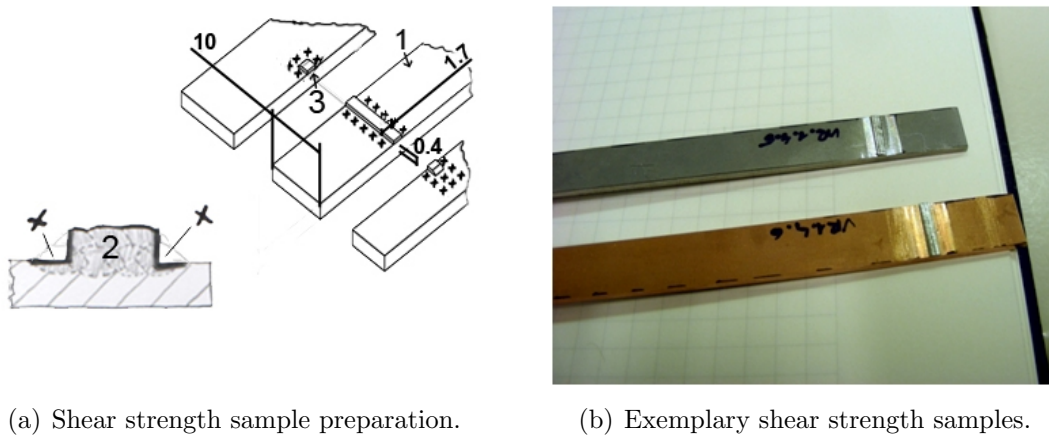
Shear strength samples. 1 strip of substrate material, 2 deposited and machined weld material, 3 cross section examinations, X by machining reduced weld bead.
